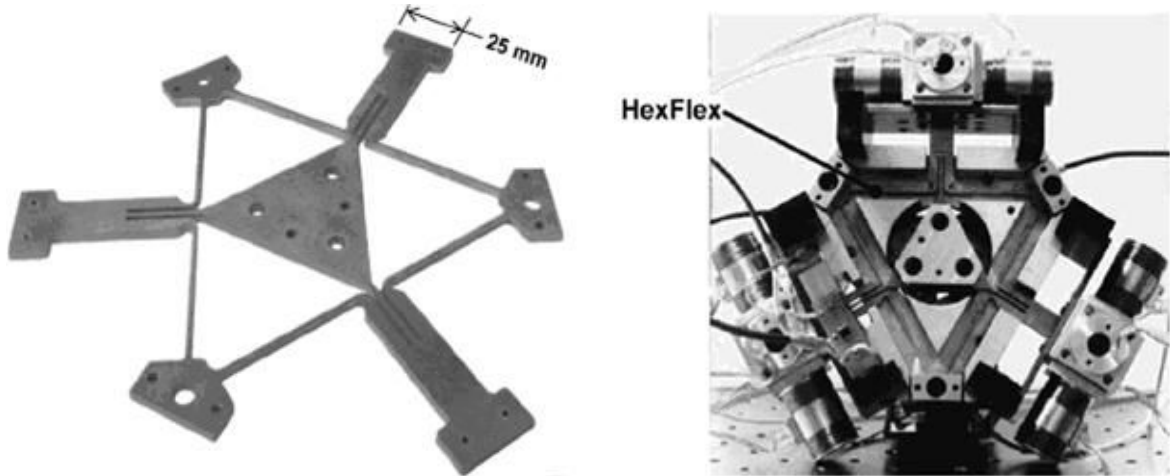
The HexFlex mechanism and the assembly of the mechanism [23]
